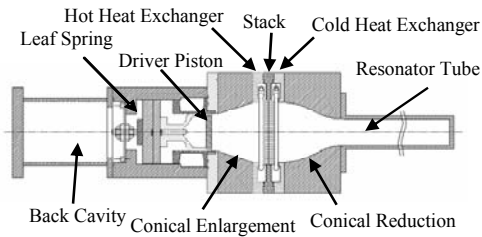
Schematic of the standing wave thermoacoustic cooler. Dimensions of the parts are listed in Table 1.
